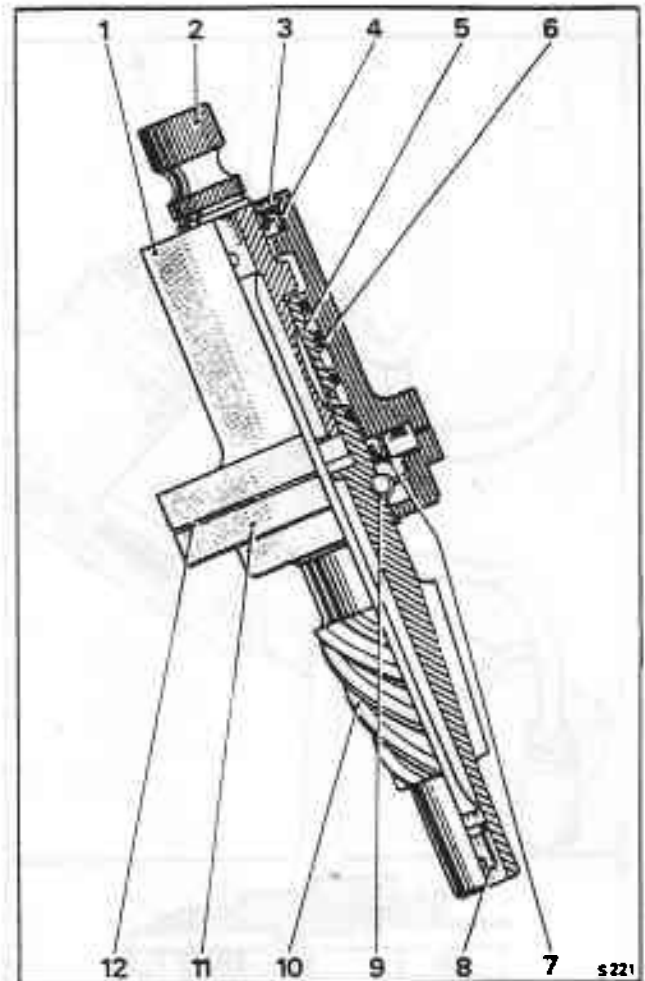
Pinion and spool valve unit – Sectioned view
